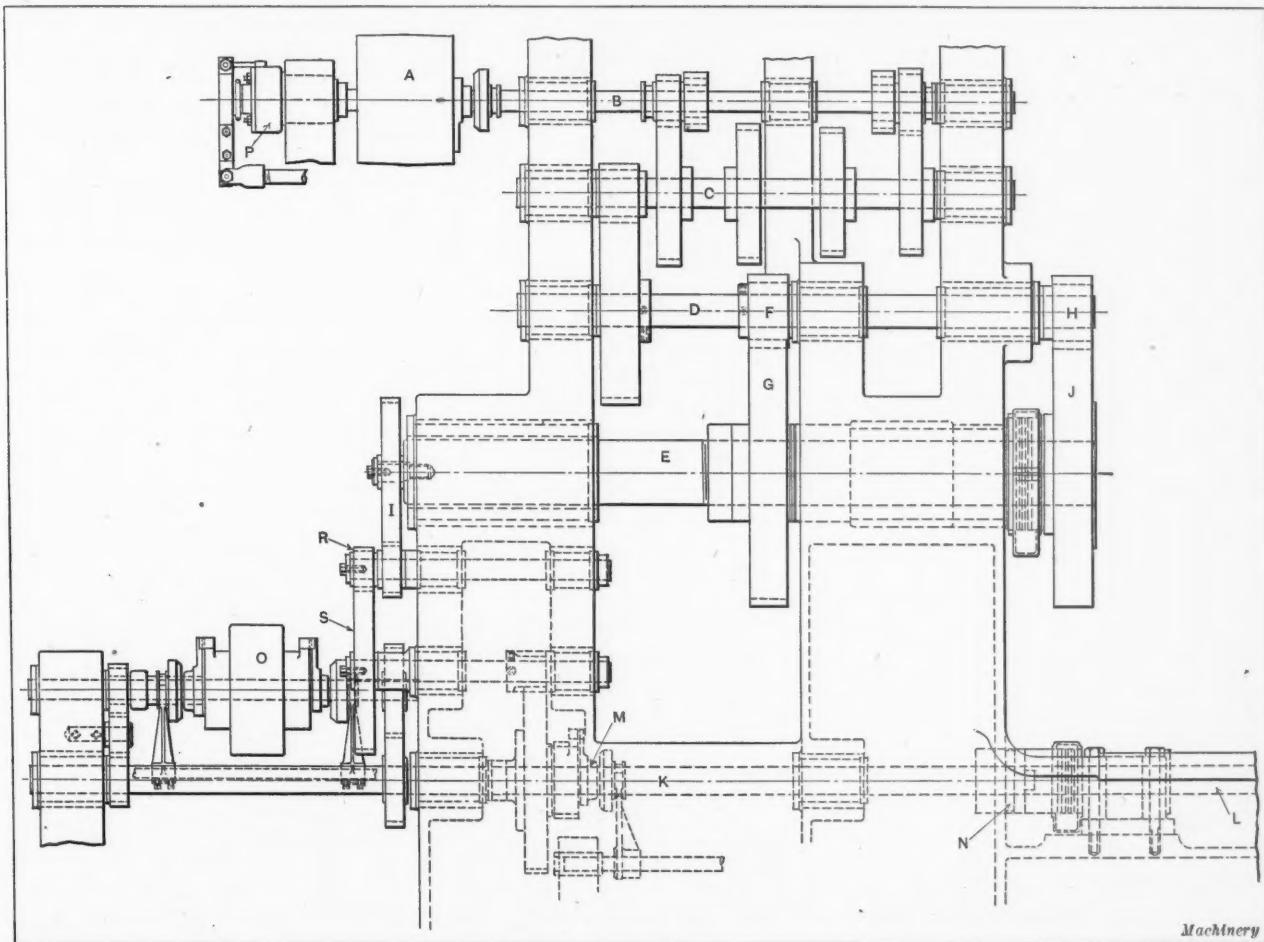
Driving Gearing for Spindle and Feed Mechanism of Shell Turning and Boring Machines
